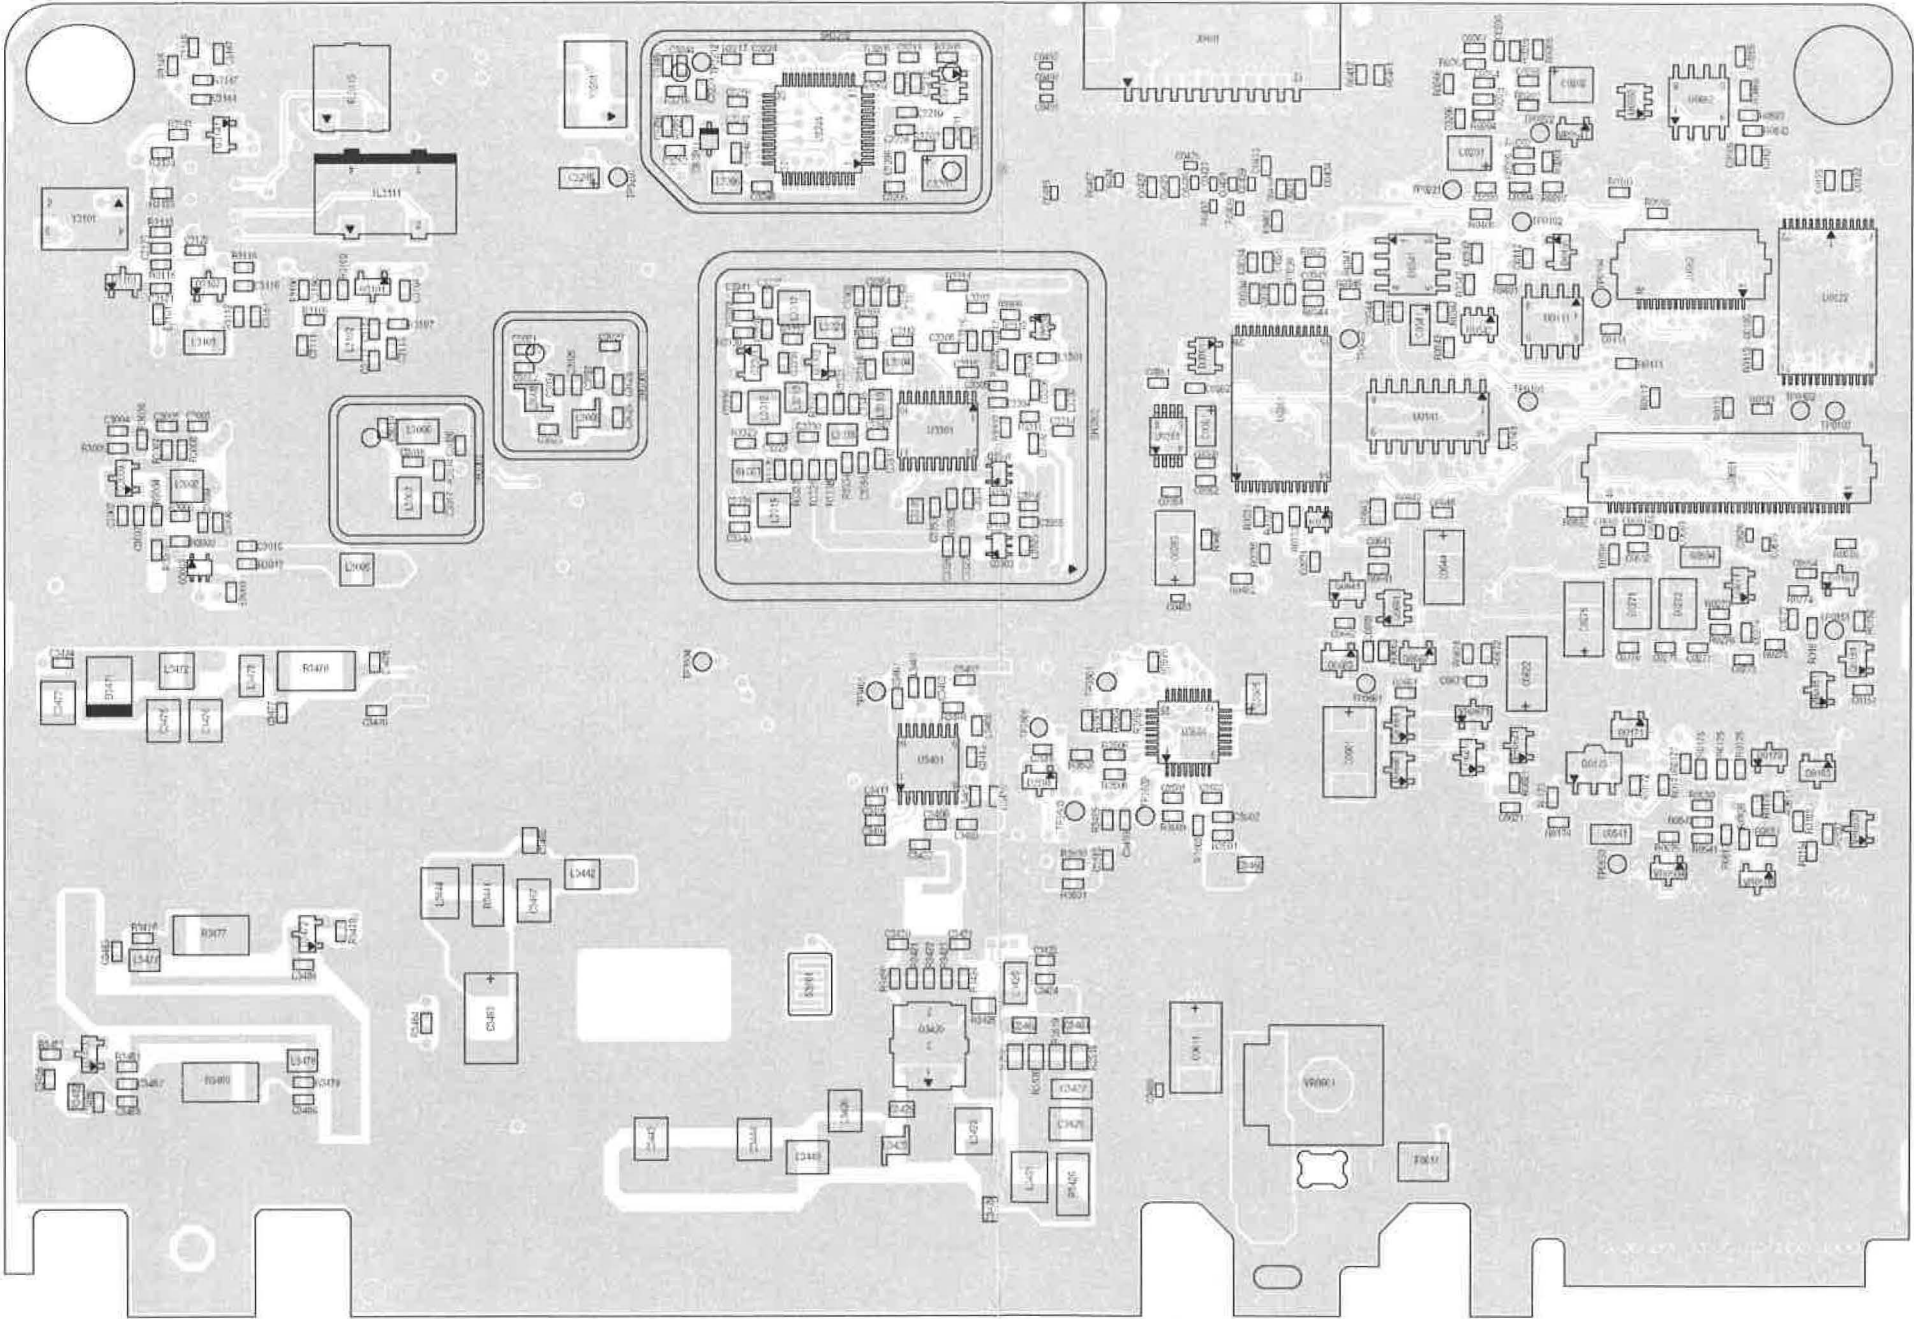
700 MHz Main Board Bottom Side PCB
